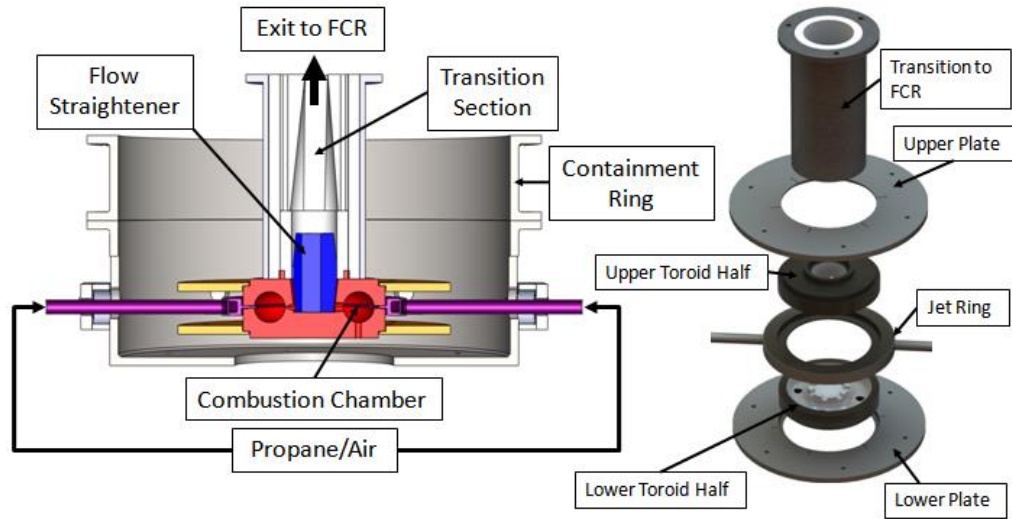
Cross section view (left) and exploded view (right) of the WSR.
